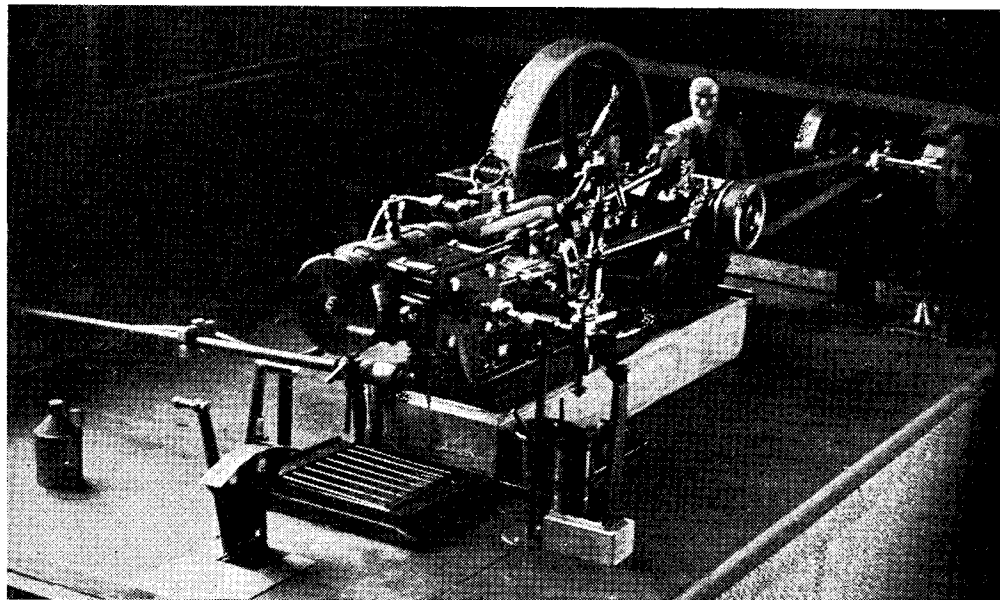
General view of "engine room," showing walls on two sides, steam lever and quadrant, grinding machine, exhaust pipe, steam pipe through floor, and dummy figure
